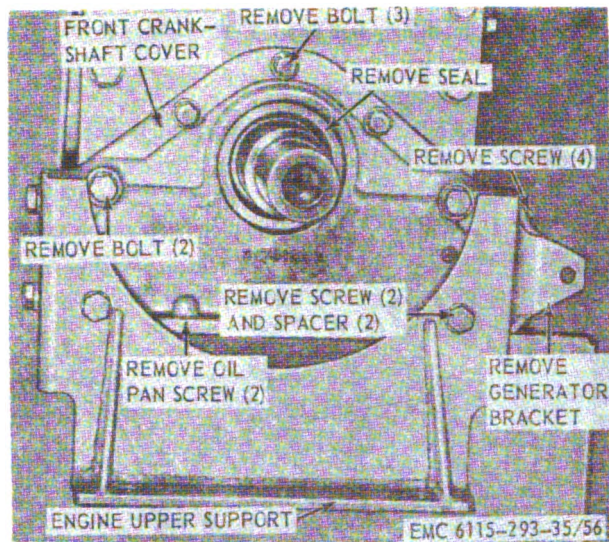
Engine upper support and front crankshaft cover, removal and installation.
